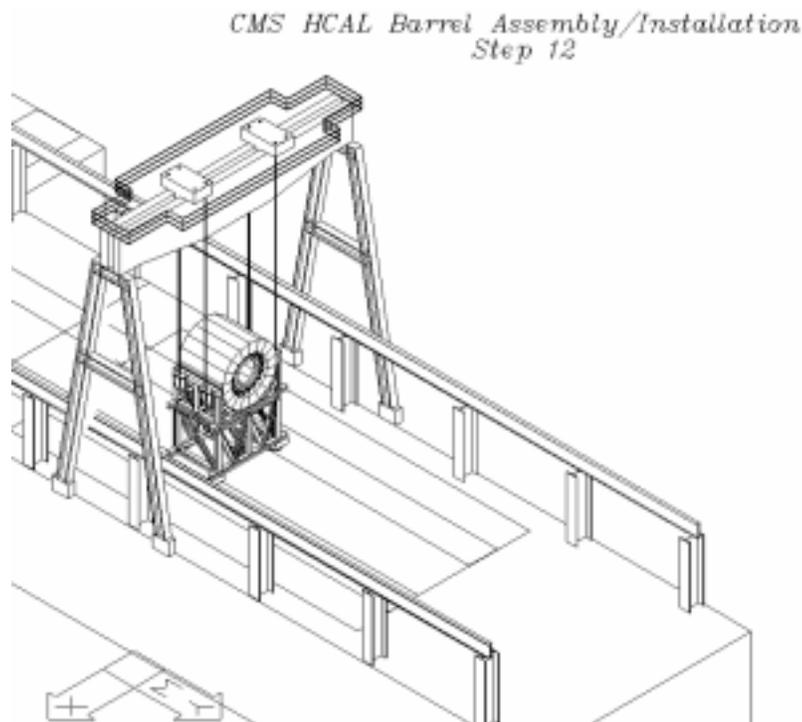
CMS HCAL barrel assembly / installation step 12.
